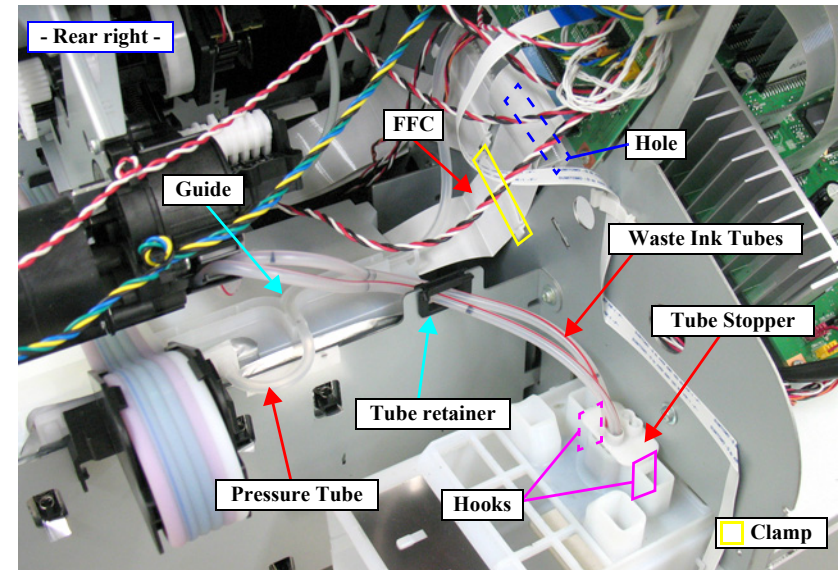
Releasing the FFC, Waste Ink Tube and Pressure Tube
